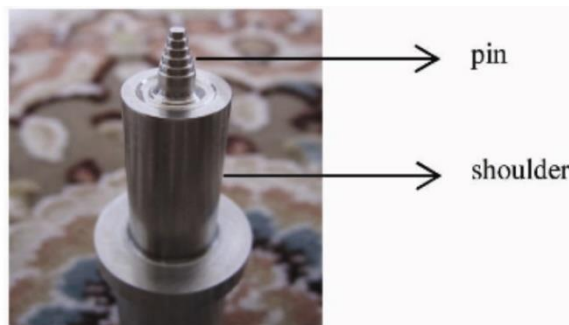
Conventional FSW tool used by Ahmadi, et al. [51]
